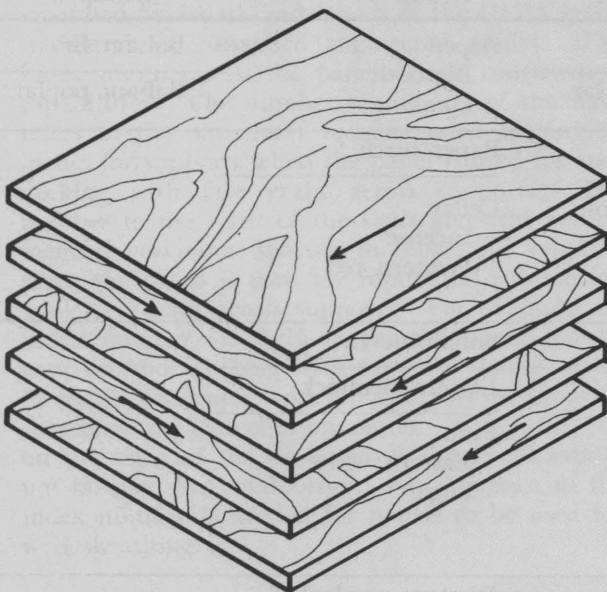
Plywood construction. Arrows show wood grain direction of each veneer sheet (ply).
